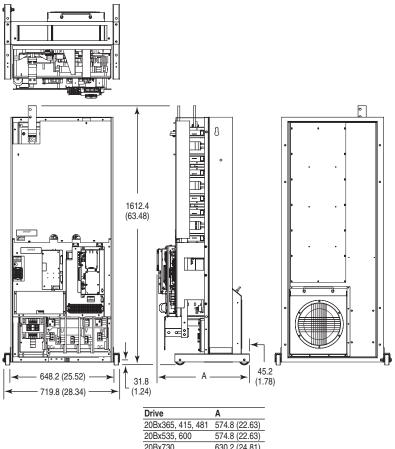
IP00, NEMA/UL Type Open - Frame 8 & 9 Roll-In
